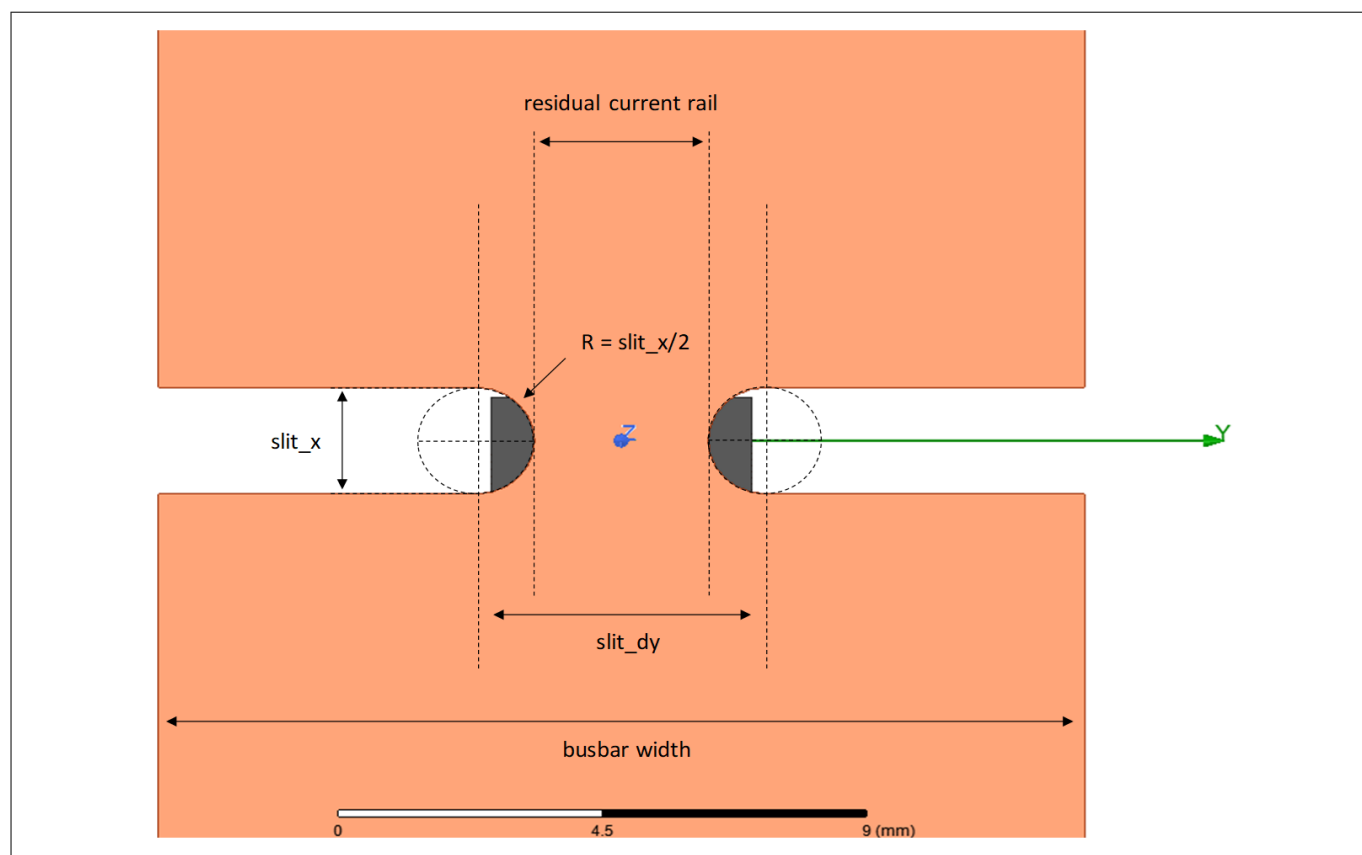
PG-VSON-6 package, busbar support, Straight slit shaped sensing structure, top view
